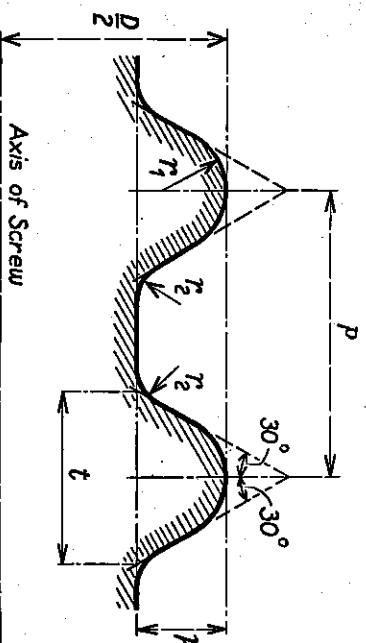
Bottle Closure Thread (Glass Container Finishes)
